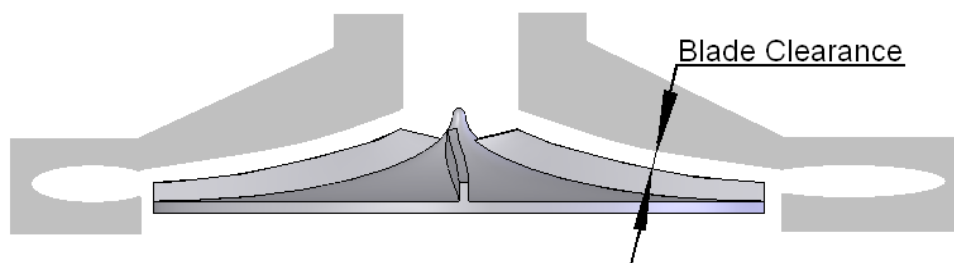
Section of a radial flow pump indicating the blade clearance length, c , between the impeller blade and the pump casing.
